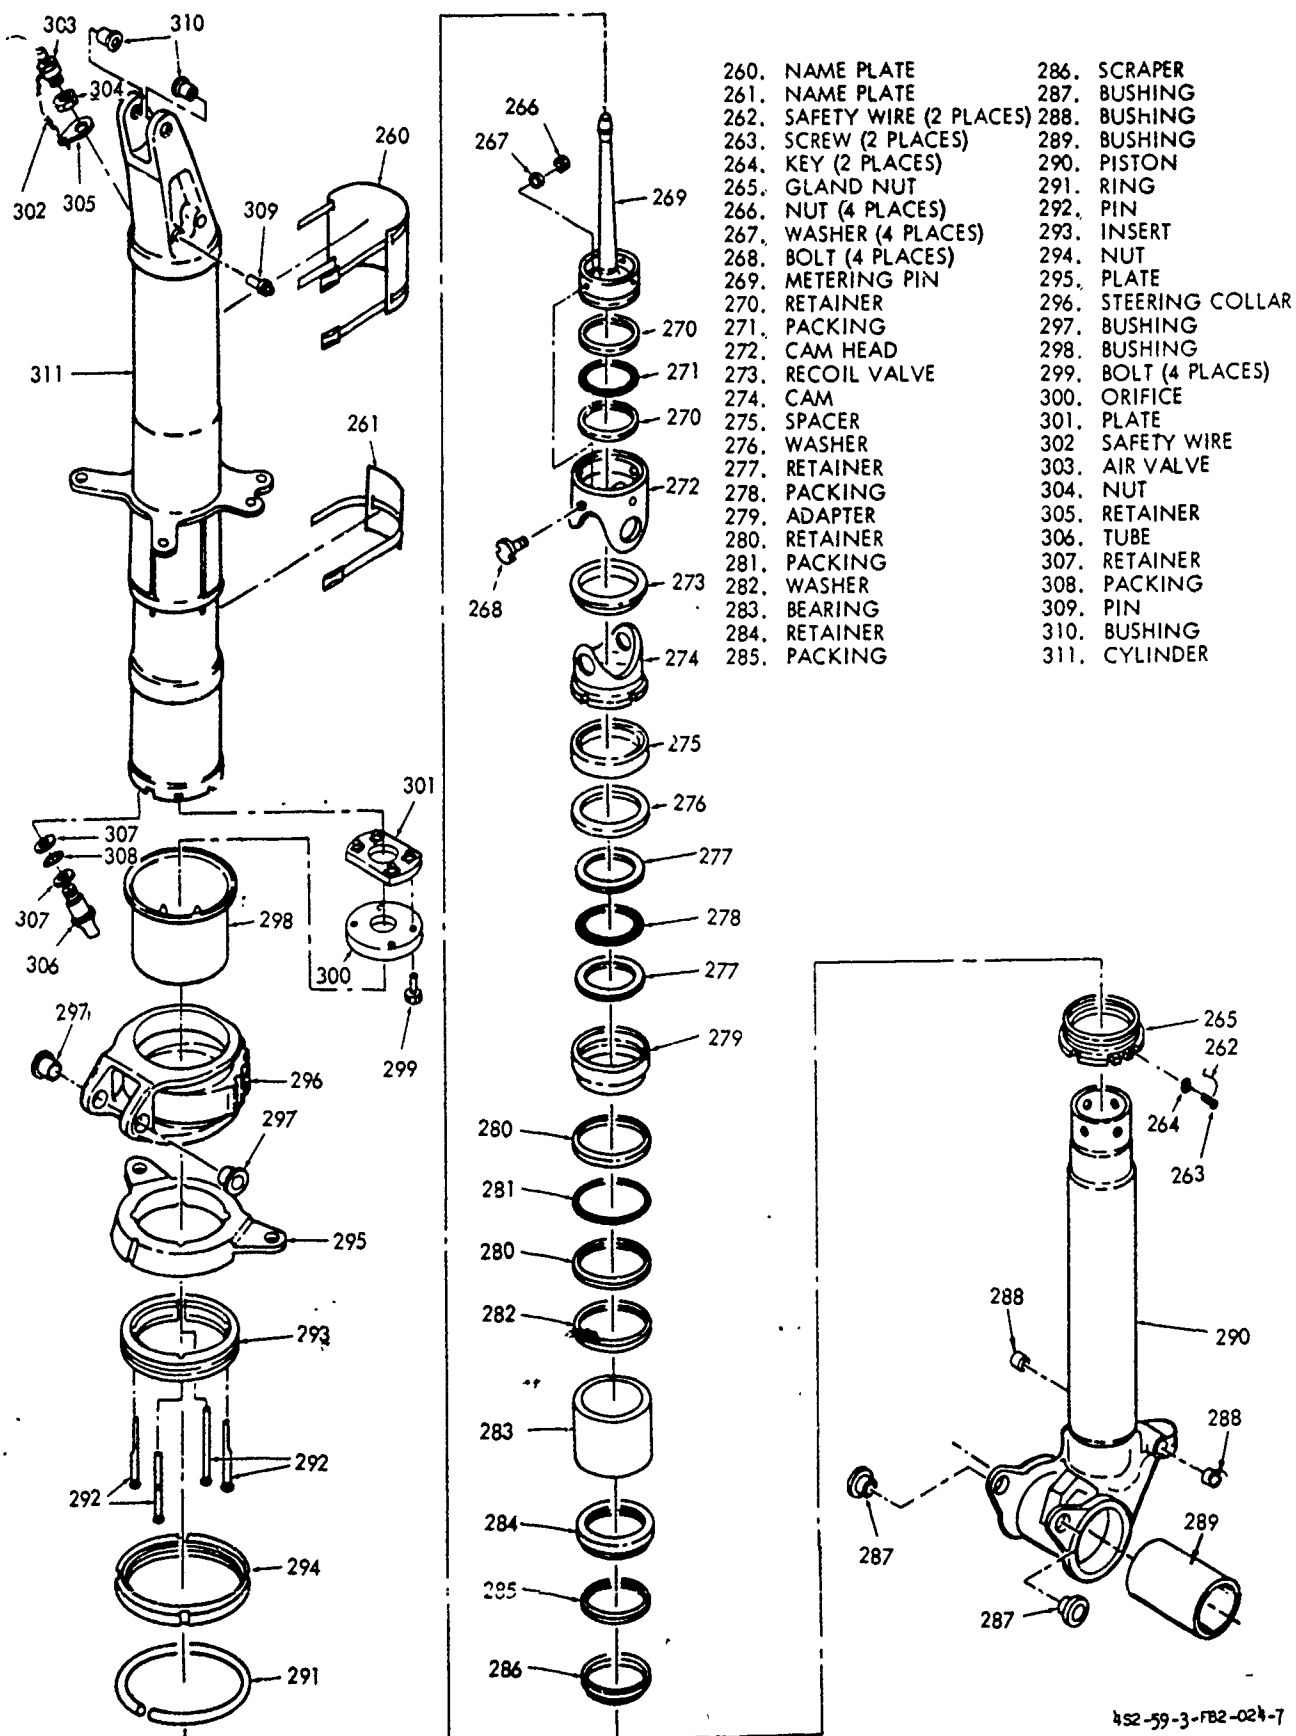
Nose Landing Gear - Exploded View (Sheet 6 of 7)
